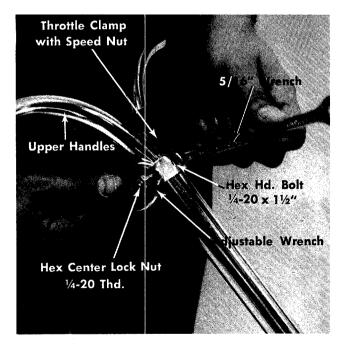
THROTTLE CLAMP ASSEMBLY
